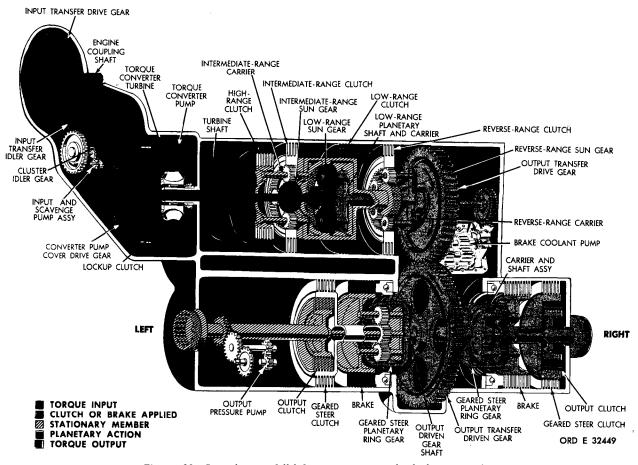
Second-gear, full-left-steer torque path, lockup operation
